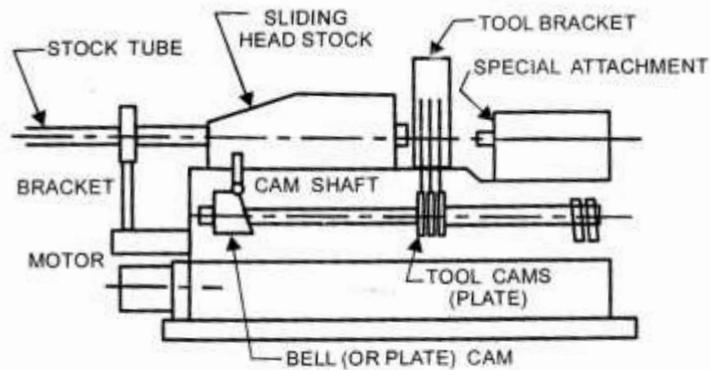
LAYOUT OF SWISS TYPE AUTOMATIC SCREW MACHINE
